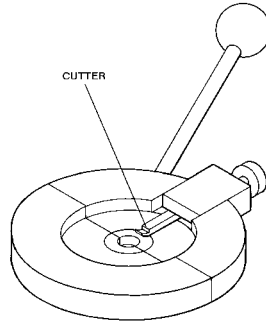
Pressure Gauge Weld-Machining Tool
